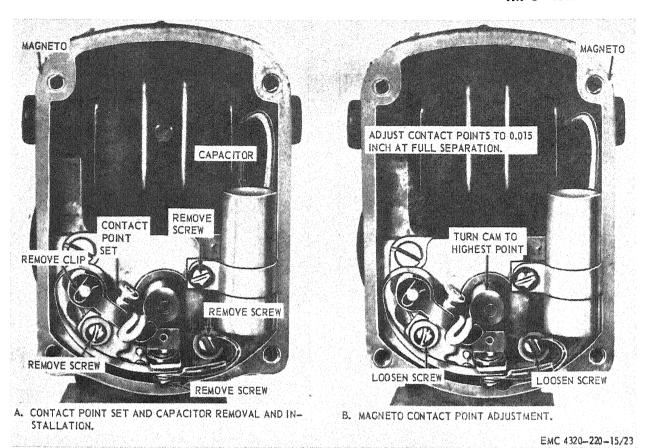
Magneto contact set and capacitor, removal and installation, and contact points adjustment.
